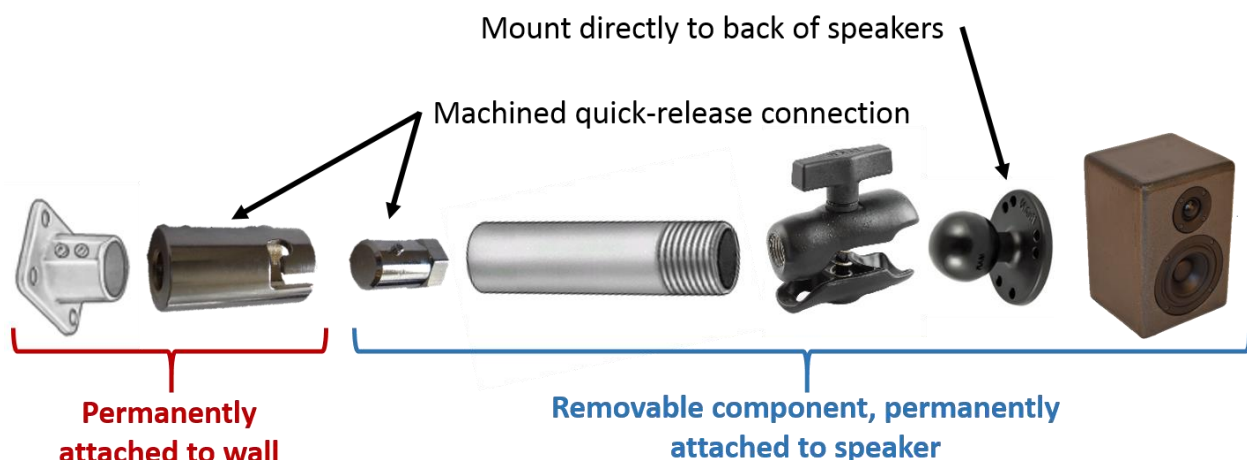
Diagram of the mounting system designed for accurate placement and simple removal of the loudspeakers.
